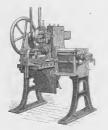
MUIR'S SELF-ACTING UNIVERSAL SHAPING MACHINE.
